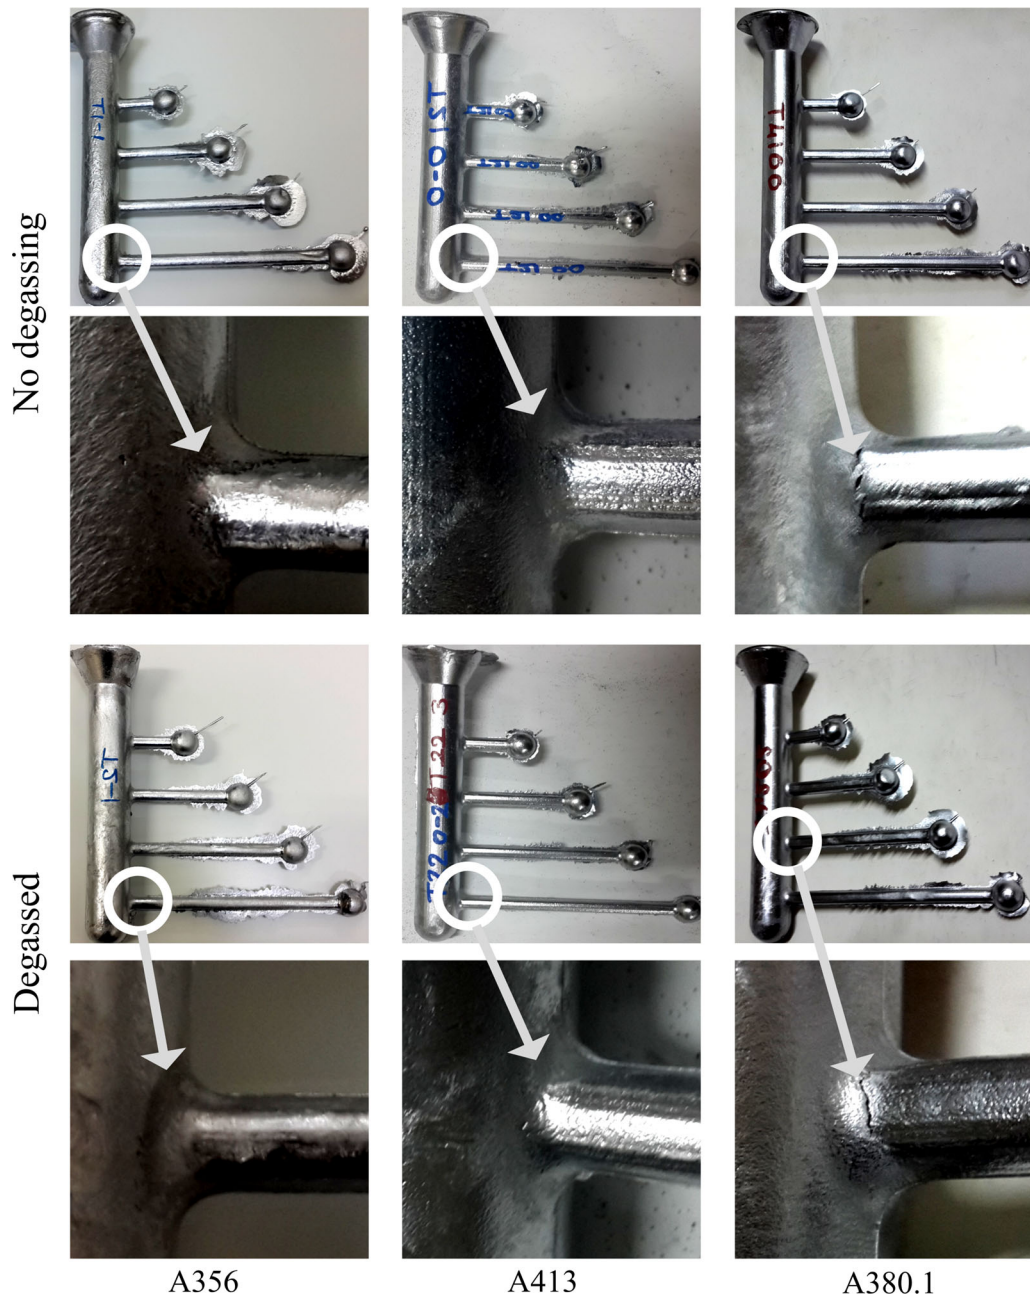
Casting parts from CRC mold (a) 356, (b) 413, (c) 380.1.
